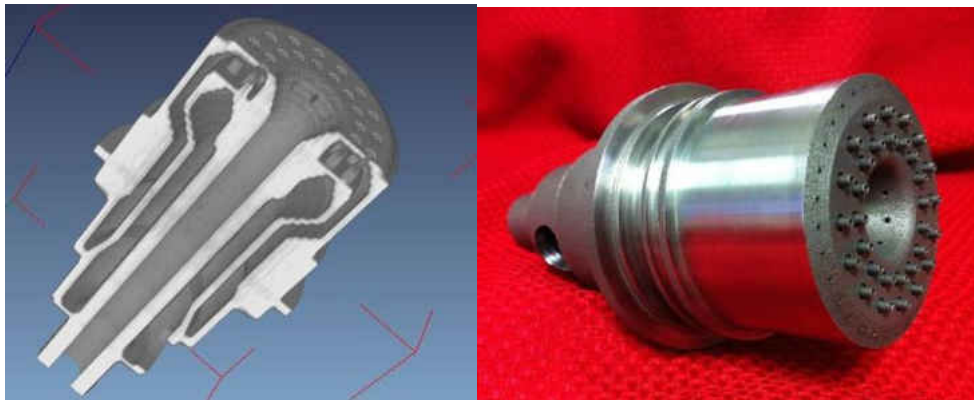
3D printed rocket injector - CT scan cross section (left) and final part (right) [2]
